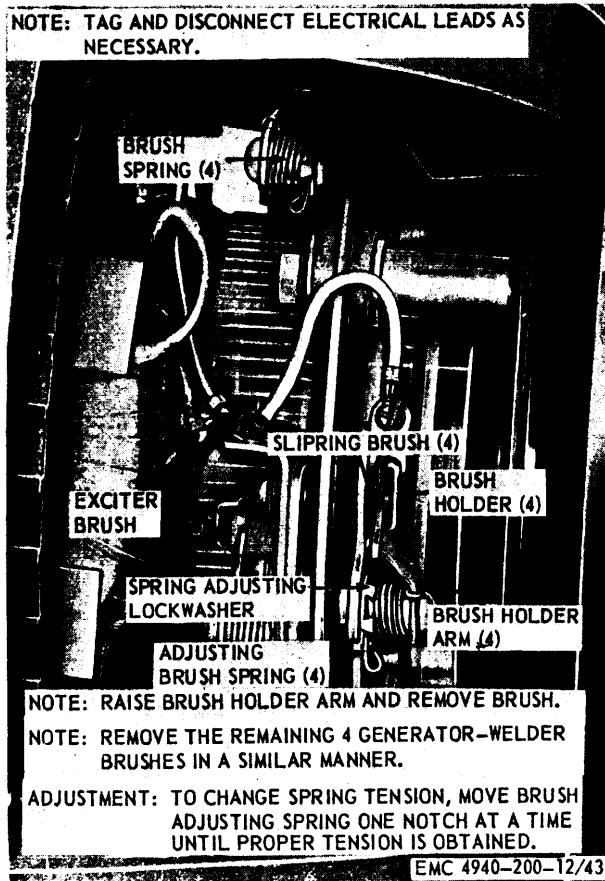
Generator-welder brushes, removal, installation, and adjustment.
